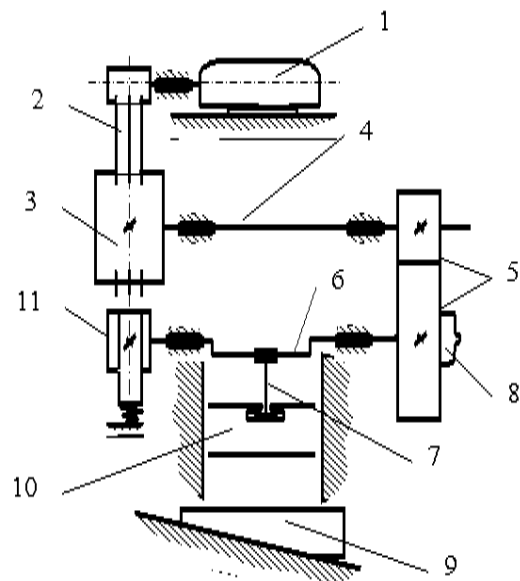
Crank press: 1- electric motor; 2- V-belt transmission; 3- fly-wheel; 4- countershaft; 5- gearing; 6- crank shaft; 7- connecting-rod; 8- friction coupling; 9- bed plate; 10- ram; 11- band brake
